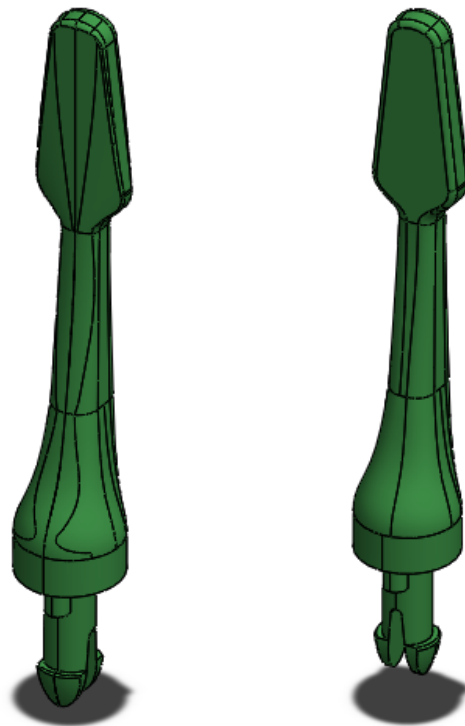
CAD geometry for the injection moulded prototype to the left and accurate CAD geometry for the toothbrush head to the right.
